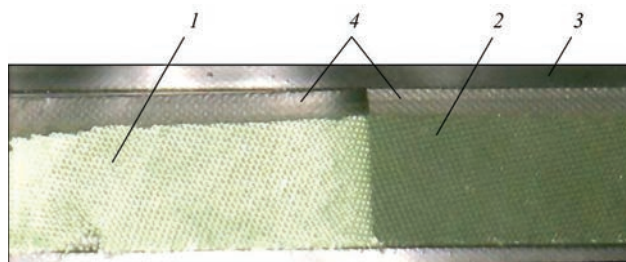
Weld of Unisol 950 laminated fabric with a lack-of-penetration near the weld edge after testing for tearing off of the connecting tape; 1 — torn off strip with exposed cord; 2 — weld; 3 — HAZ near the weld; 4 — zone of lack-of-penetration on the weld and on the tape
